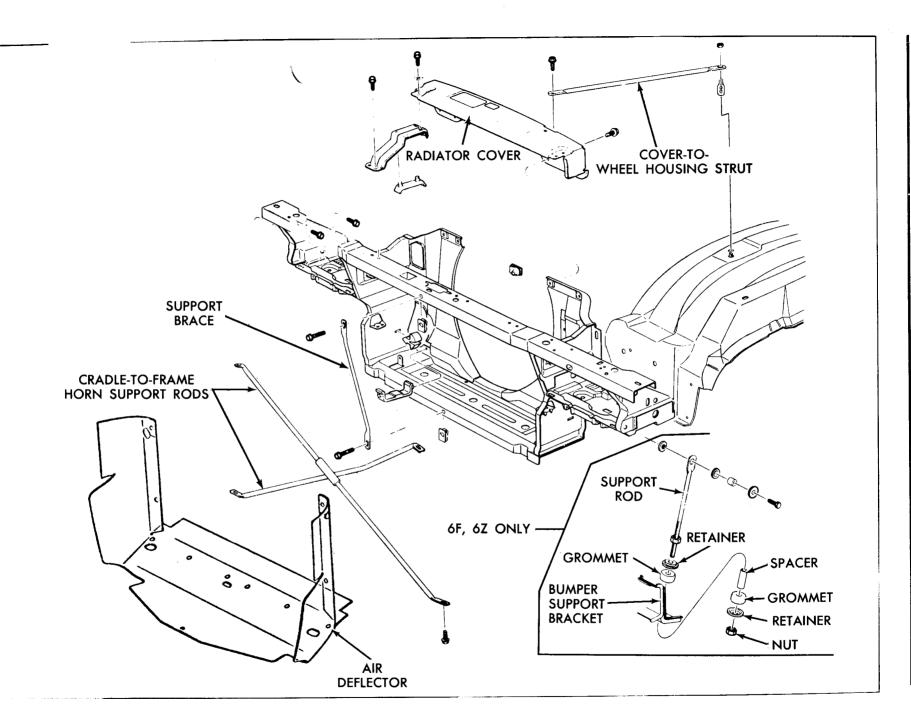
Radiator Cradle Assembly—Except Eldorado
